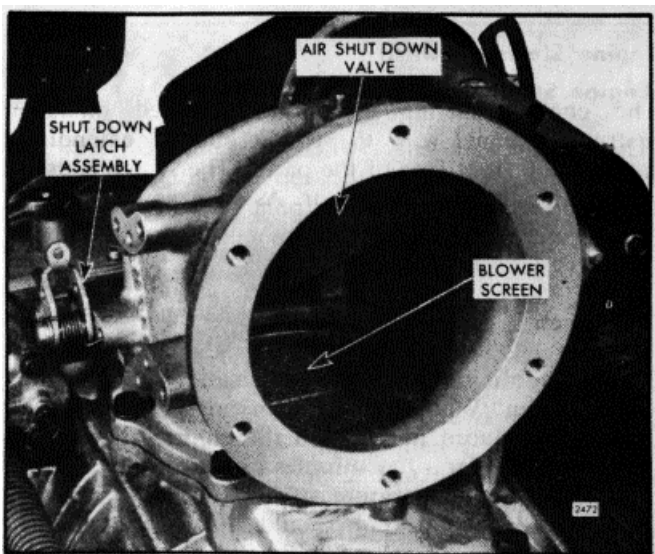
Manually Operated Emergency Engine Shutdown Valve Mounting
